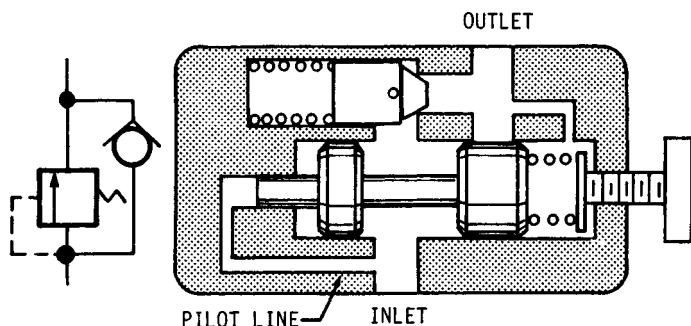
Counterbalance valve holds fluid pressure in part of a circuit to counterbalance weight on the external force. (From Ref. [43.1].)
